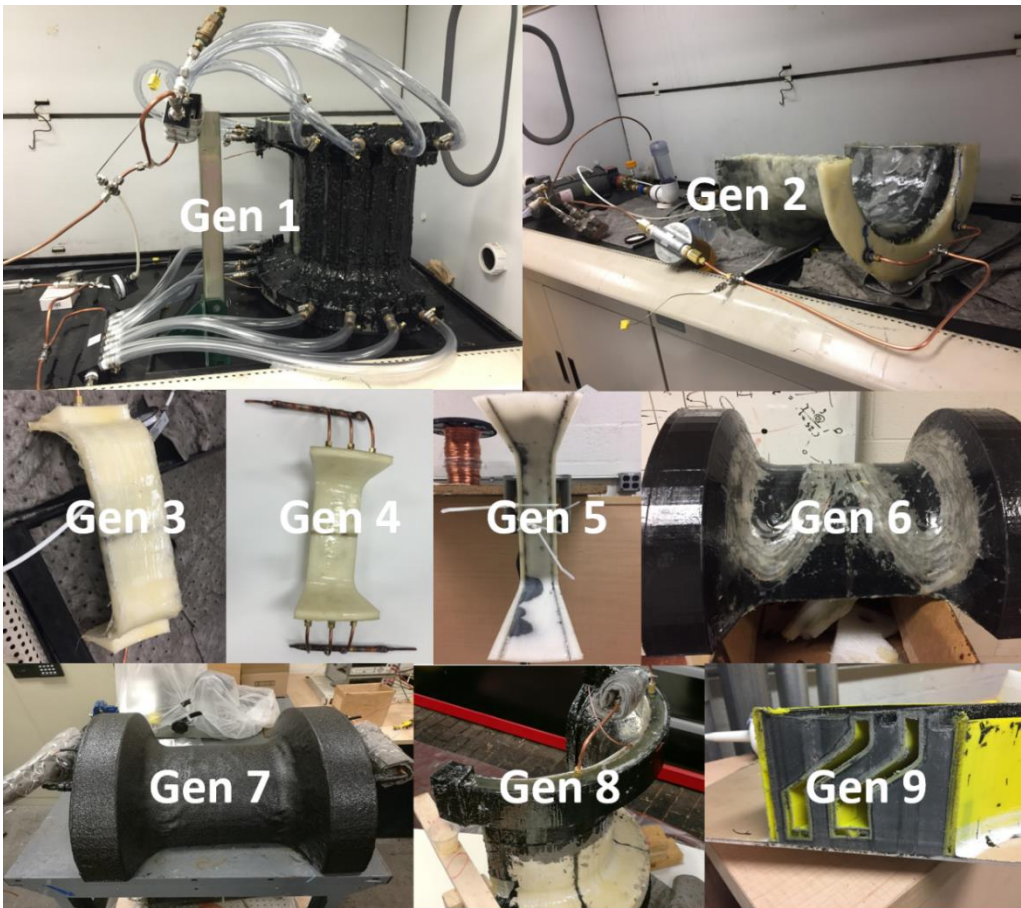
Multiple Generations of Magnetic Wire Housing Assembly with Different Sealing Approaches
